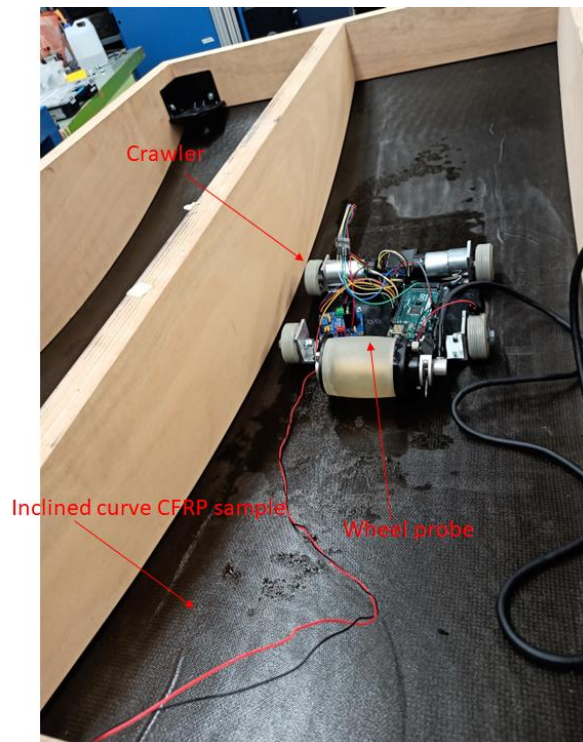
Tested C-scan probe with crawler and CFRP sample.
